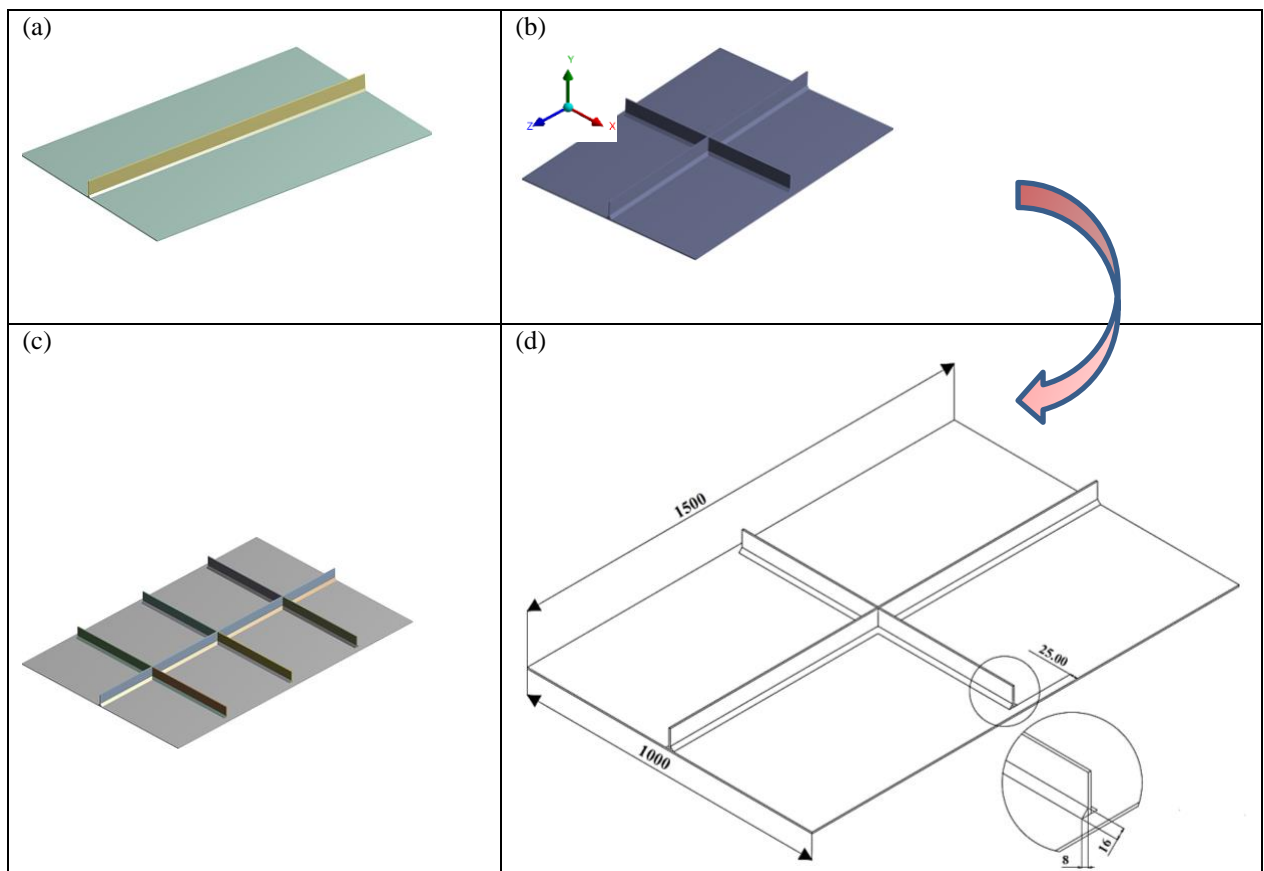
Figure IV. (a) Plate with girder, (b) plate with girder and two stiffeners, (c) plate with one girder and 6 stiffener (d) a sample 3D Cad model with detailed dimension of plate, girder and stiffener.
